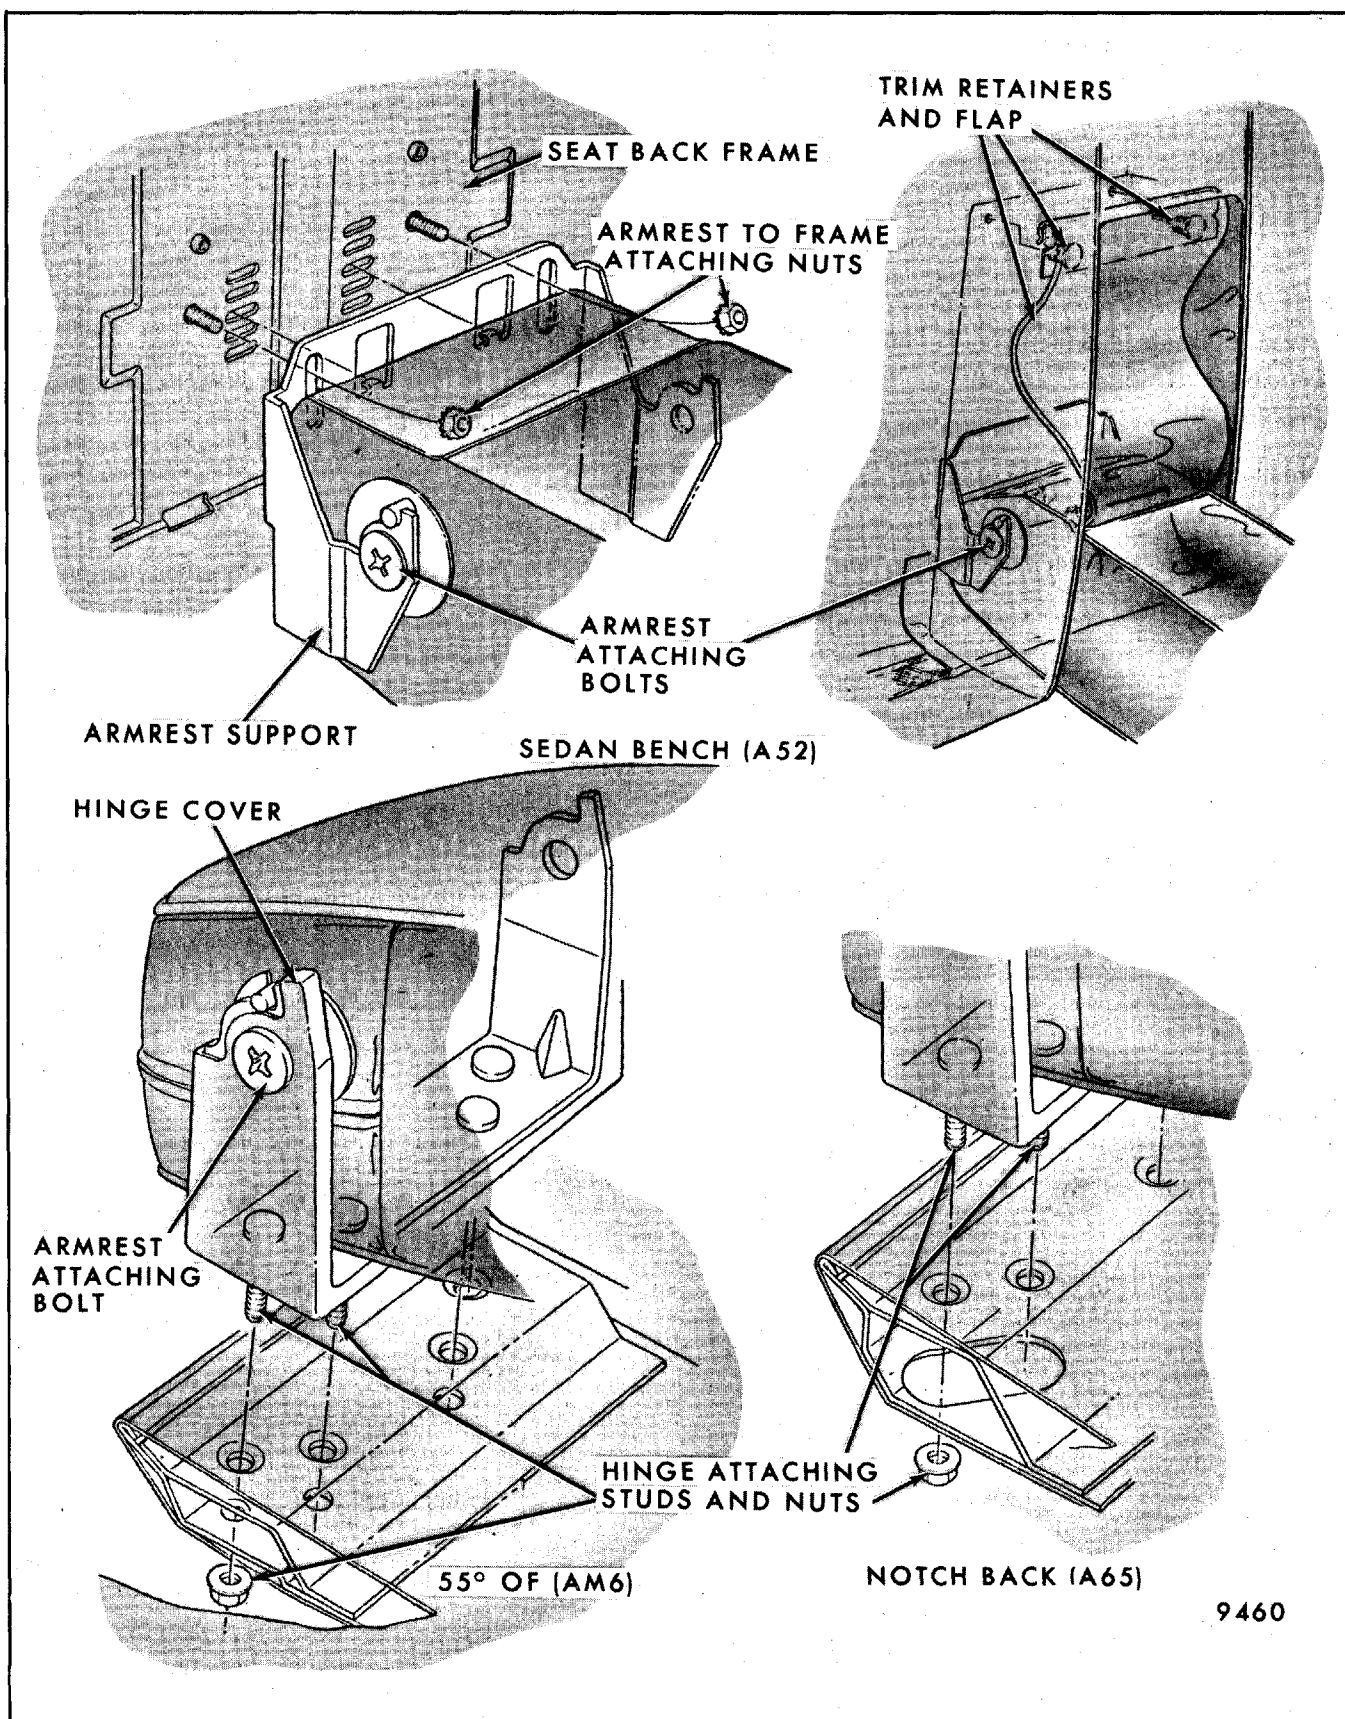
Front Seat Center Armrest - Full Width, Notch Back and 45-55 Seats - "B, C and D" Styles
